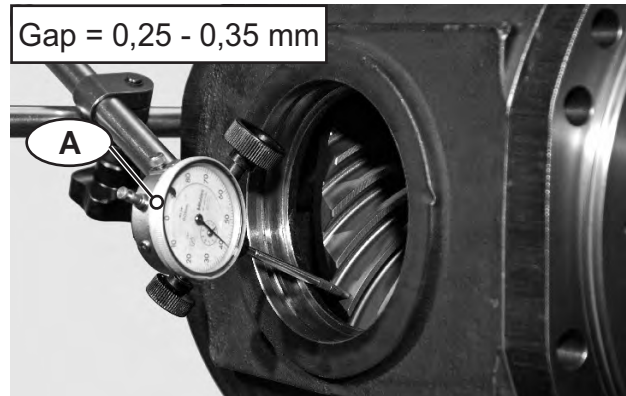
Introduce a dial indicator "A" with long tracer through the hole provided for the cap. Position the tracer on the side of a tooth of the gear ring, approximately 5 mm from the outer rim; preload by about 1 mm and zero the comparator. As you hold the pinion in position, move the gear ring manually in both directions to check clearance between pinion and gear ring. Standard clearance: 0,25 - 0,35 mm
